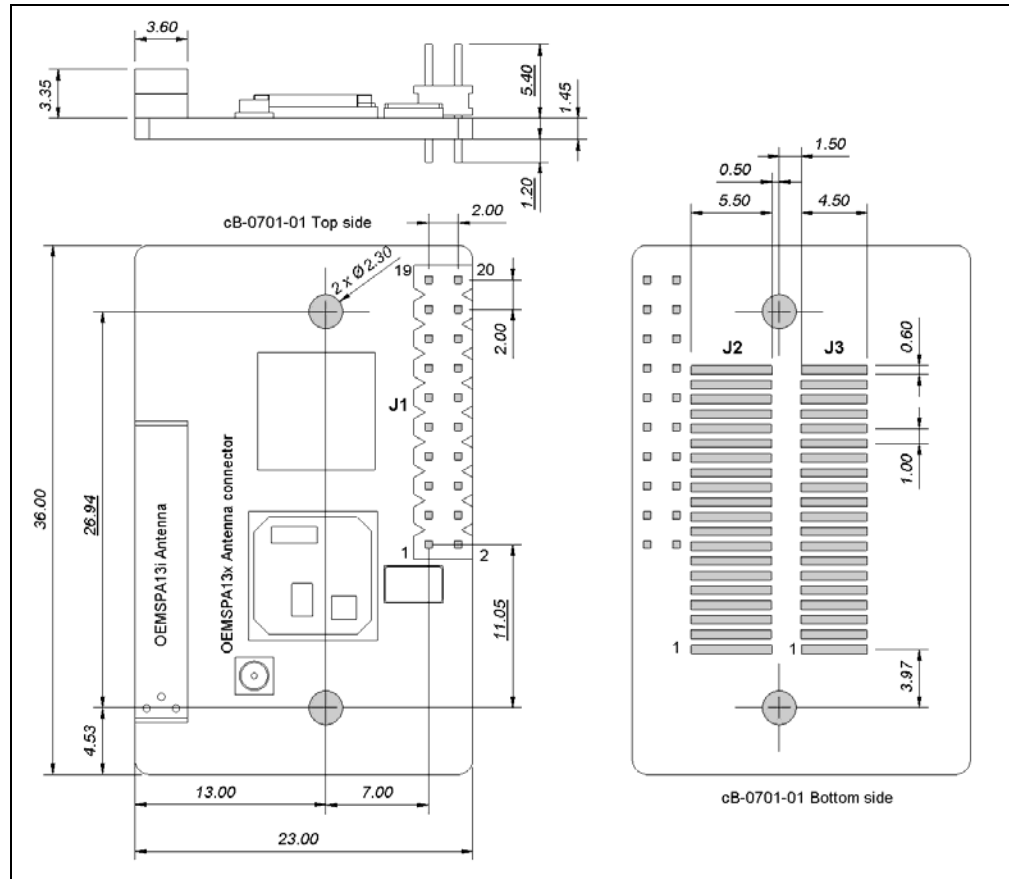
cB-0701-01 dimensions [mm]. The J2 pads are longer to fit both the SEI and FSI connector (see Section 5.4).
